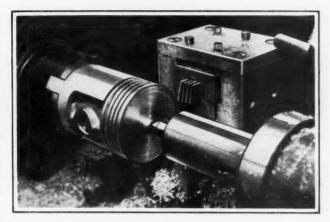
Grooving Lynite Pistons; Pieces Machined per Tool Grind: 5000
